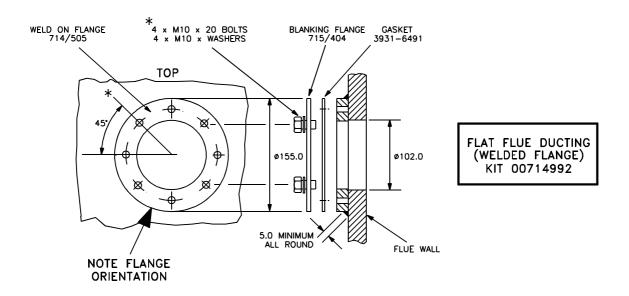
A Mounting Flange Orientation - Flat Flue Ducting (Welded Flange)
